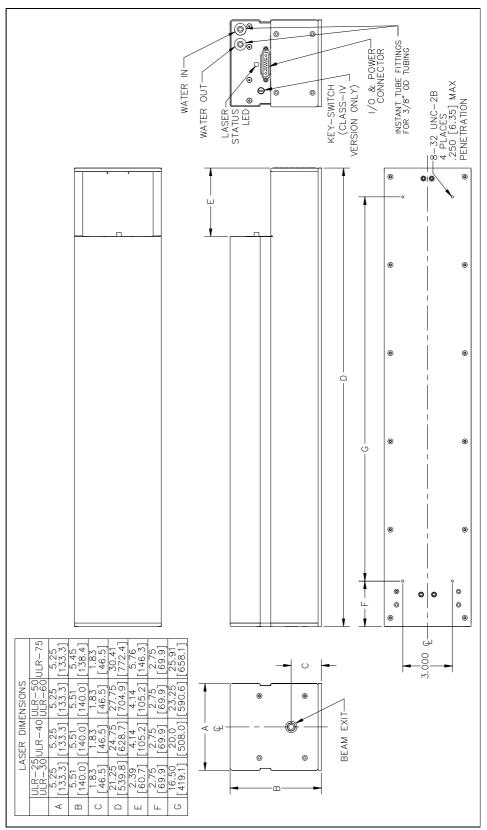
Dimensional Specifications – Integrated Water Cooled
